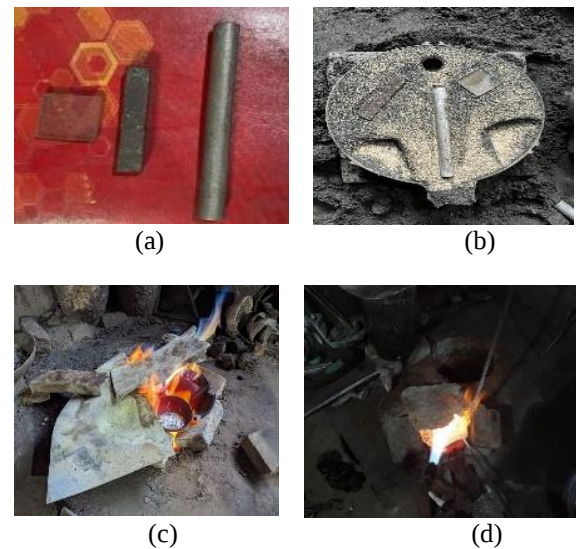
(a) Patterns for making mold, (b) Mold, (c) Pouring Powder for Melting, (d) Stirring.
